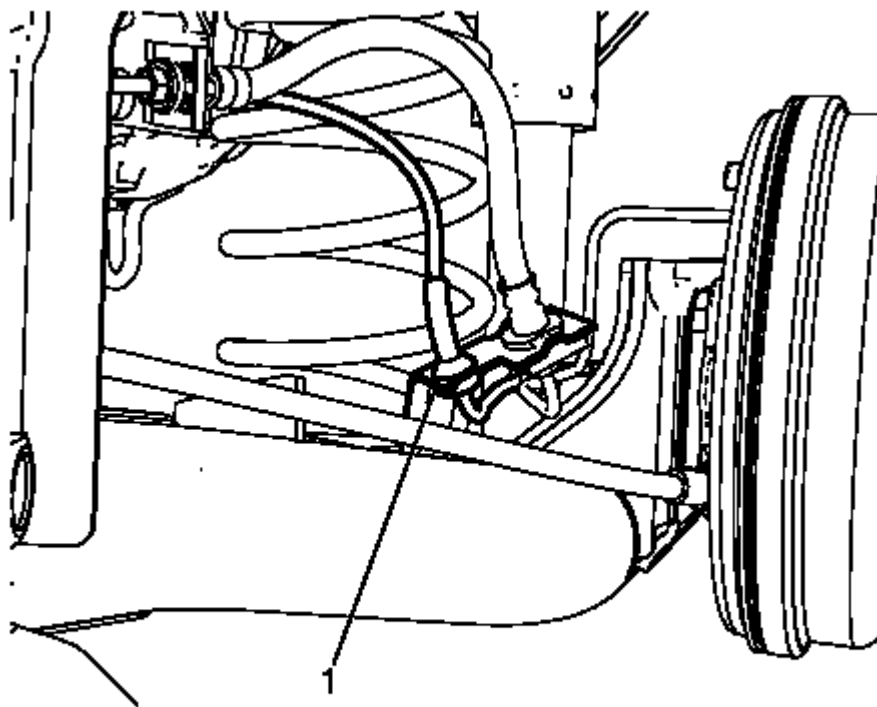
Wheel Speed Sensor Harness And Rear Axle Mounted Bracket
